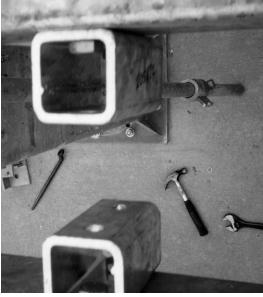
Elevation Strut Pick Up Assembly (Top View)
